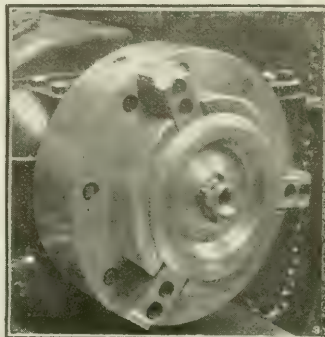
CHUCKING MOTOR CYCLE FLYWHEEL
